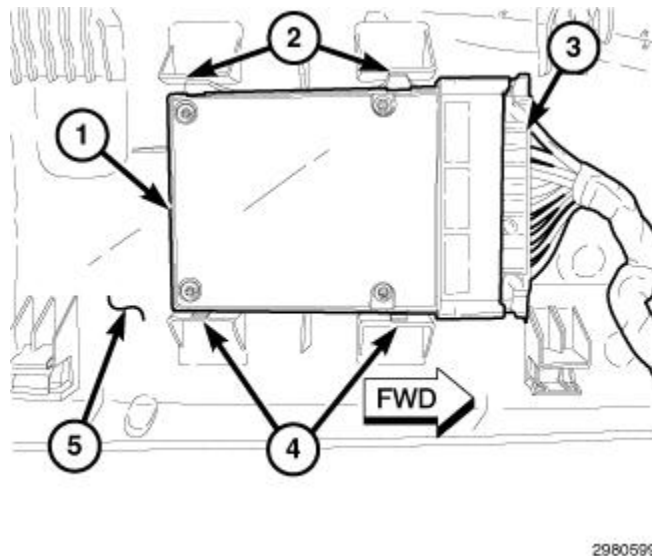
Electrical Connector, Power Seat Switch, Seat Cushion Side Trim Panel & Four Retaining Tabs
